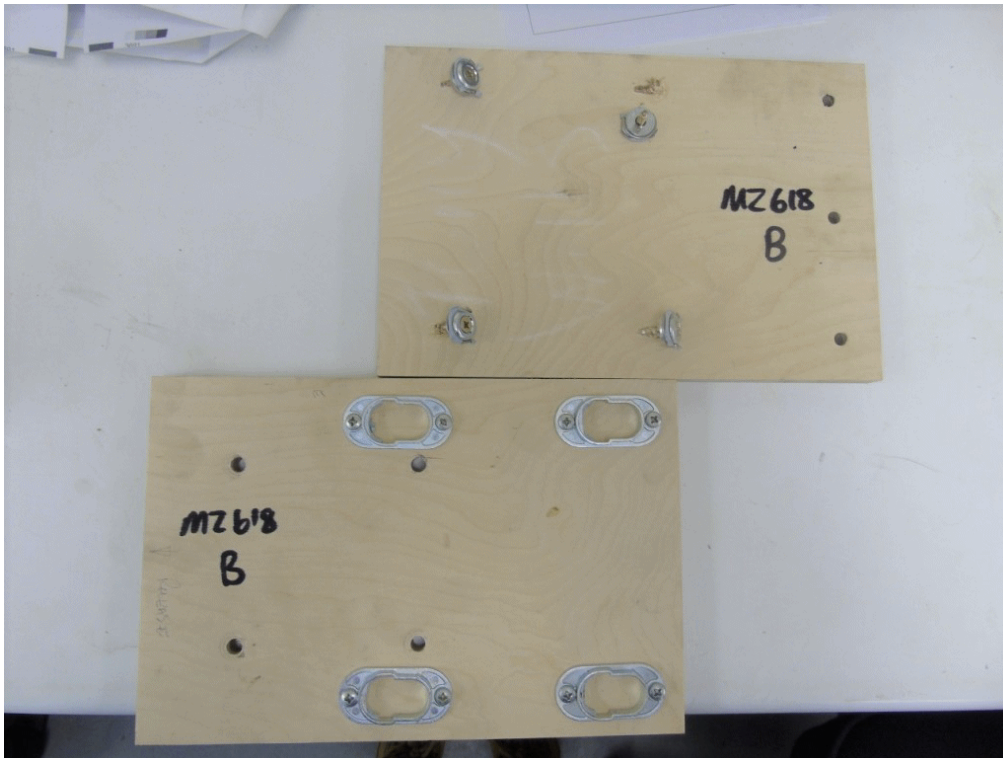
A view showing the general condition of the button after a horizontal shear test on a type 1 - metal fixing.
